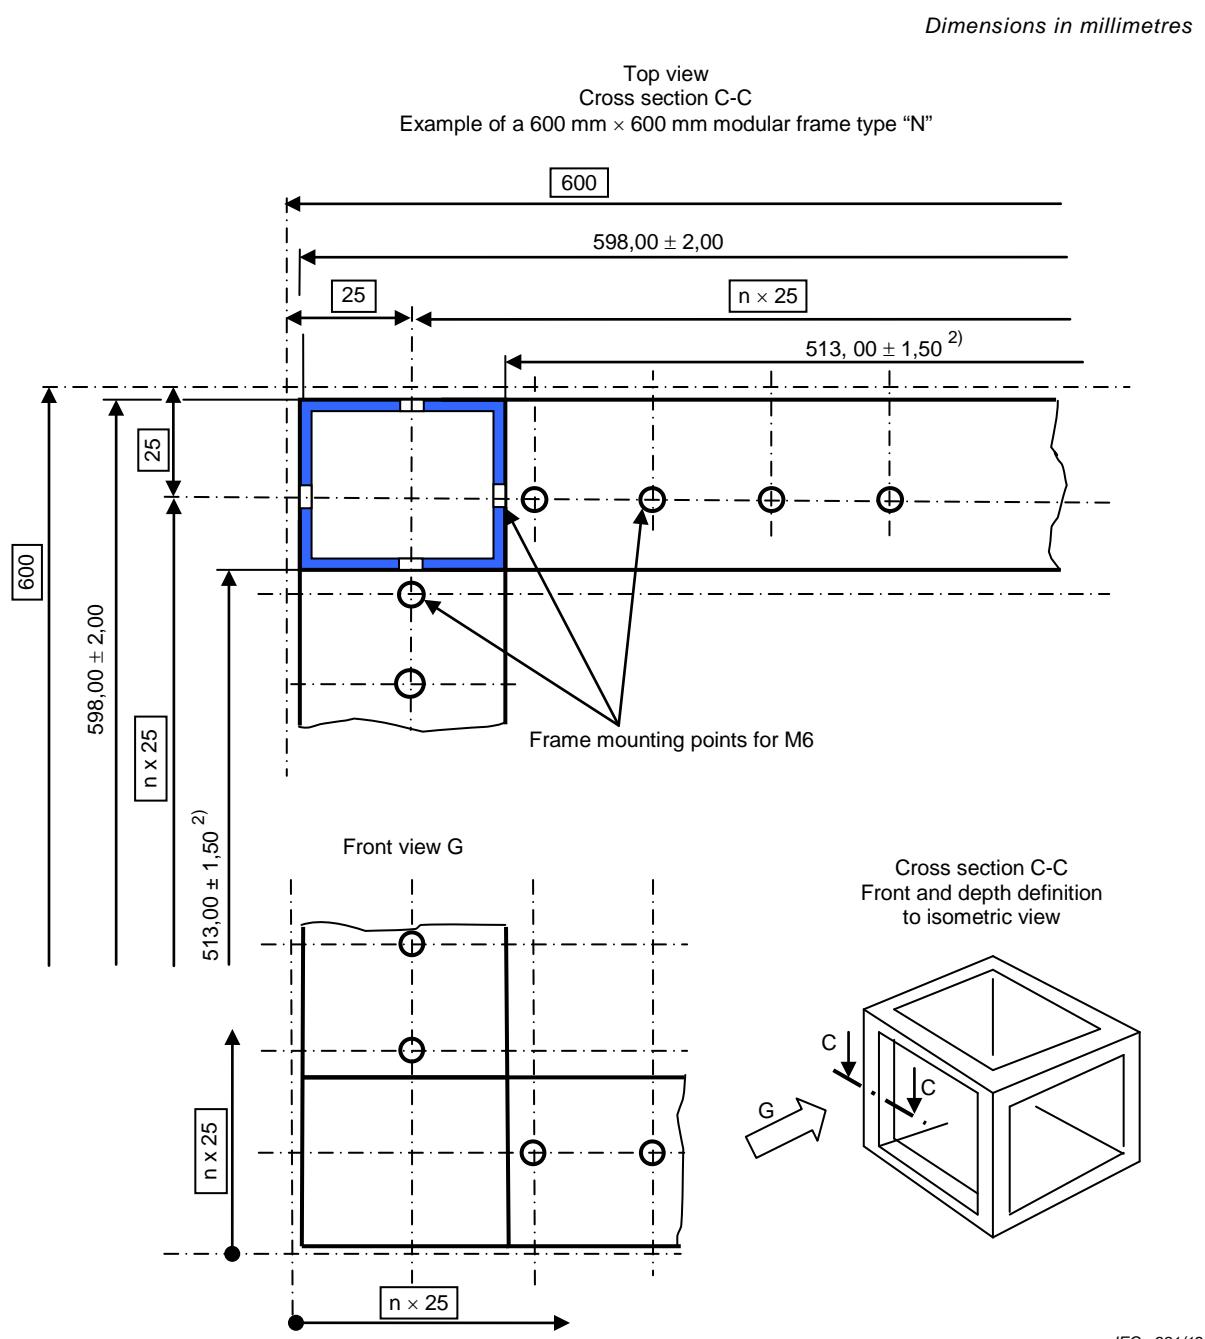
Modular frame type “N” 600 mm × 600 mm
